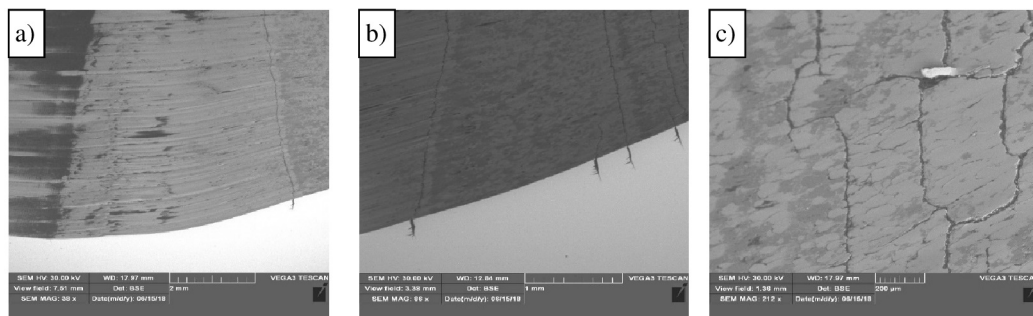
Analysis of zone III for a tool which has produced 1900 forgings
